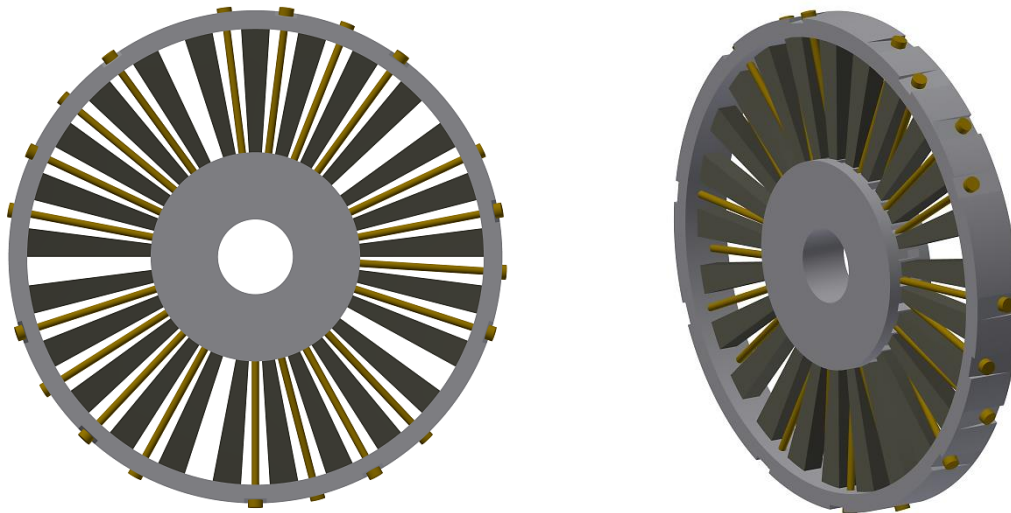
Spoked pole piece rotor (Design 8 PP)
